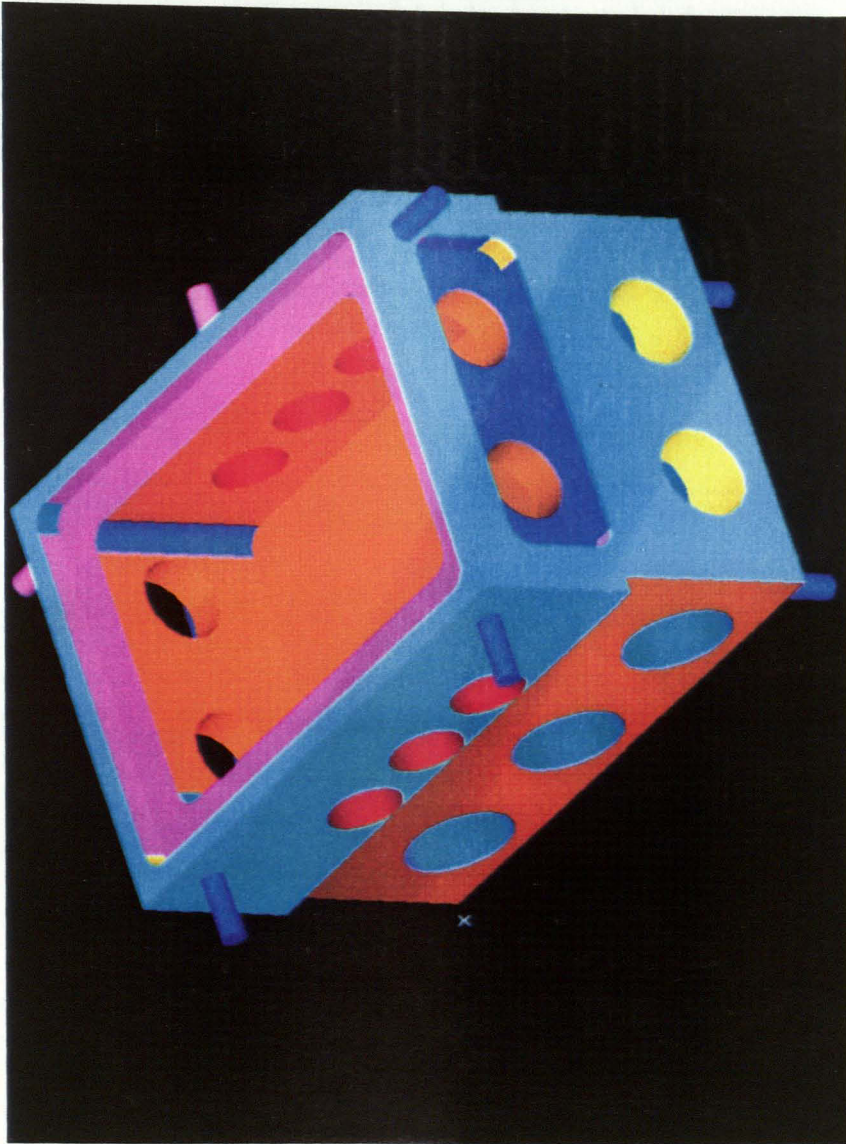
An isometric view of the workpiece with locators in blue and clamps in magenta
